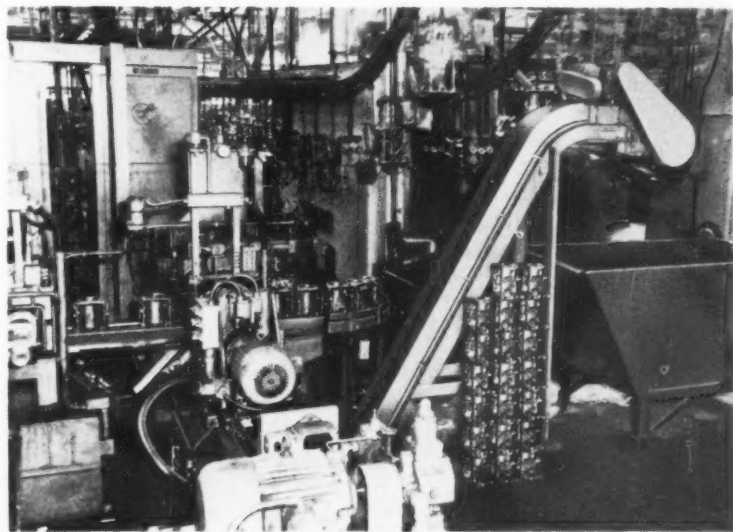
Station 52 Provides for Tapping the Cover Face Holes and Milling the Rear Face of the Mounting Flange at the Front of the Casting. Swarf Carried from each Machining Station by a Slat-type Conveyor, is Discharged by the Swan-neck End into a Large Box-pallet
